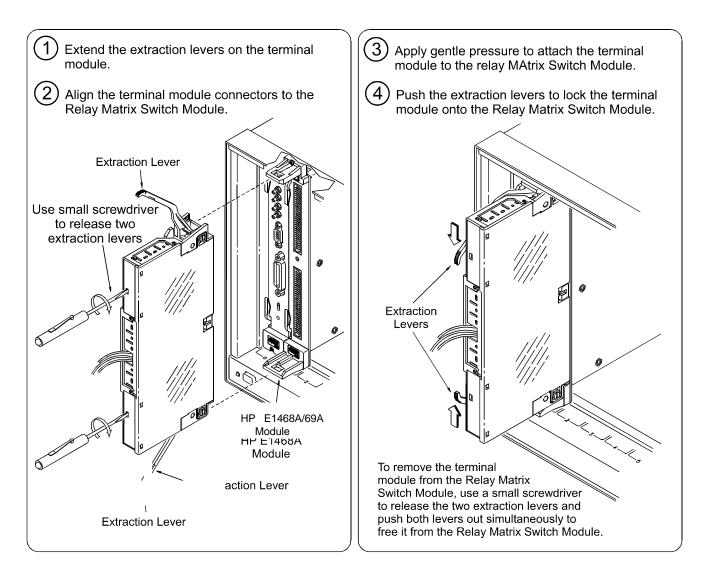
Attaching the Terminal Module to the Relay Matrix Switch Module
